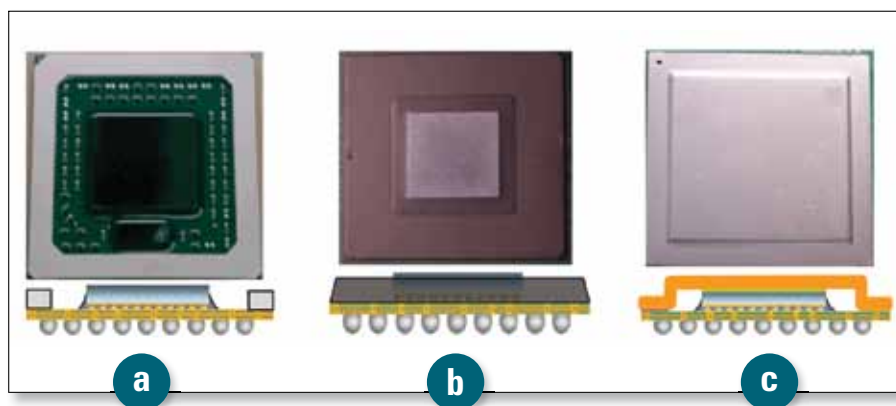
Styles of FCBGA packages. (a) Stiffener window FCBGA, (b) FCmBGA, (c) FCLBGA.
